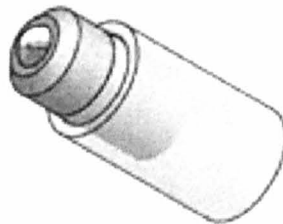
The ball transfer unit - The ball transfer unit used in the AstEx pressure plates.
